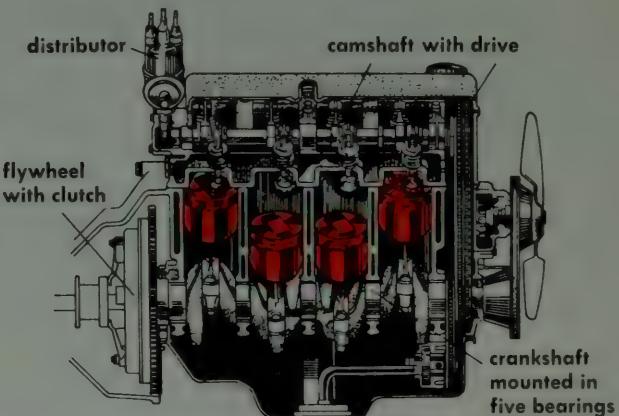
SECTION THROUGH A FOUR-CYLINDER IN-LINE ENGINE
